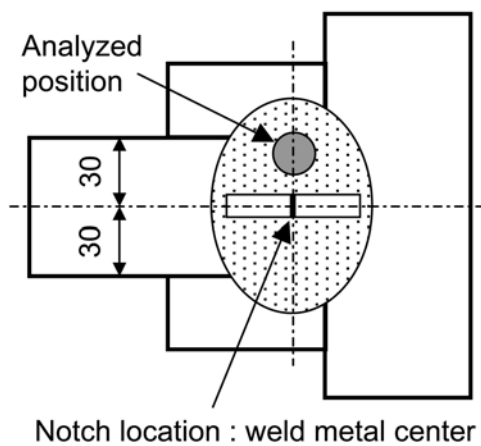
Charpy impact test specimen and analyzed position of the weld metal.
